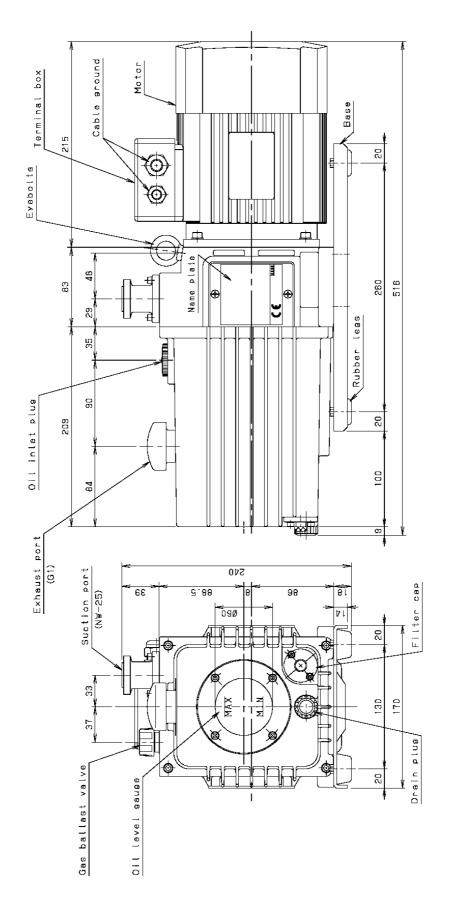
Dimensional drawing of GLD-201A oil sealed rotary vacuum pump
